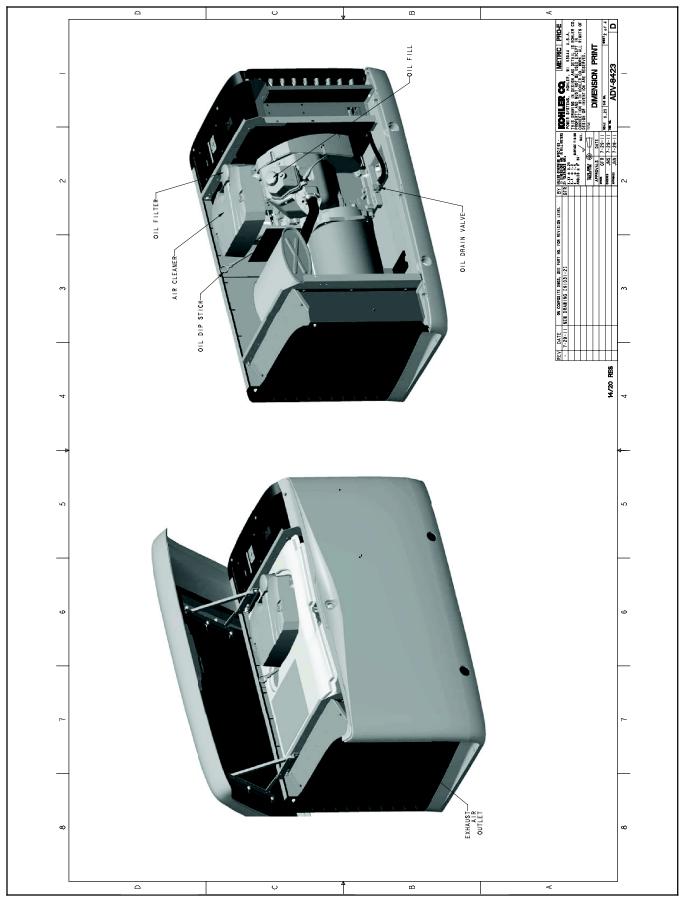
Dimension Drawing ADV-8423, Sheet 2
